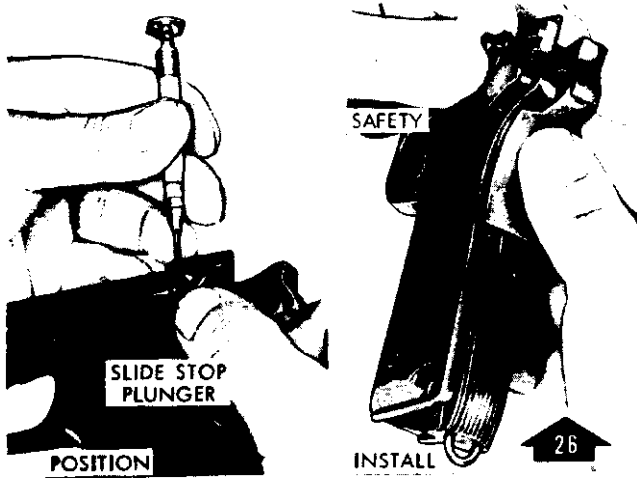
Disassembly/assembly of receiver group (1 of 7).
